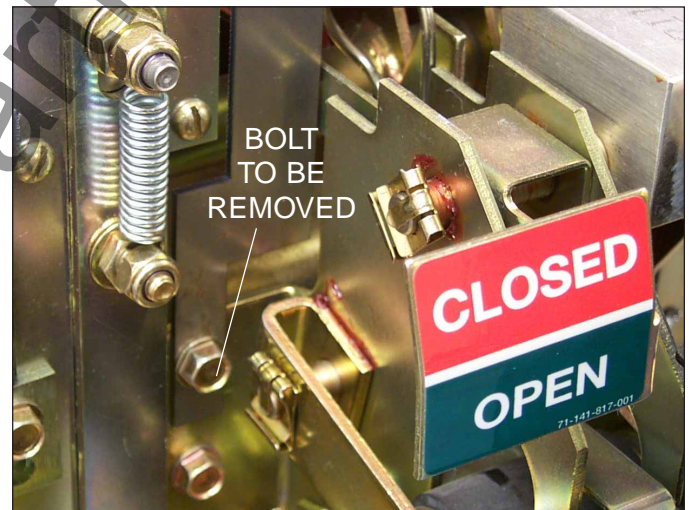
Bolt to be Removed and Saved (LAF-1600 B).
